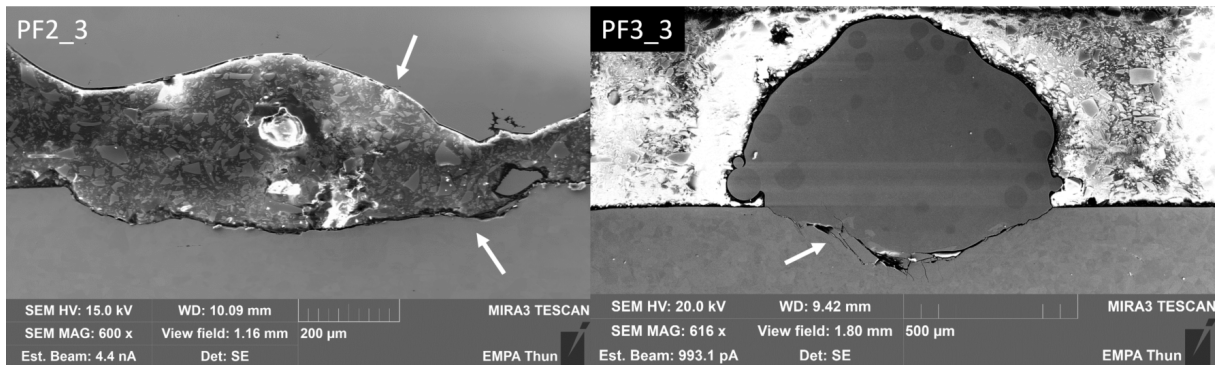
Cross-sections of Wall PF2_3 and PF3_3. The cracks are marked with white arrows.
